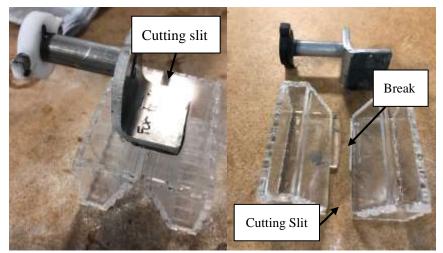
Cutting tool before drop (left). Cutting tool after second drop (right). The cutting tool split in half during the second drop, ending the test with a fail.
